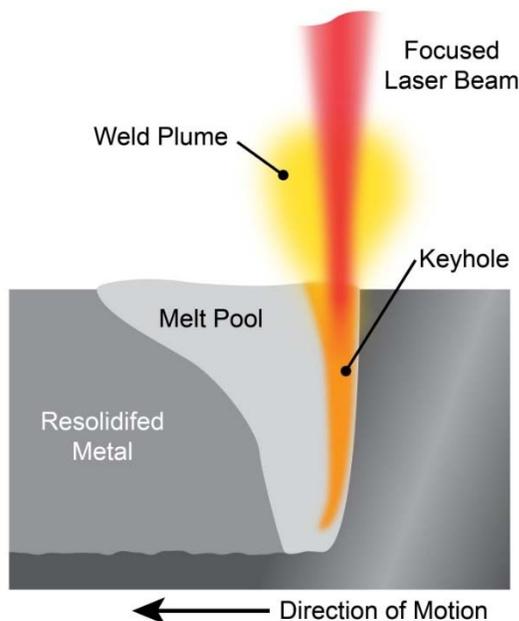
Schematics of key hole and melt pool in laser welding.
